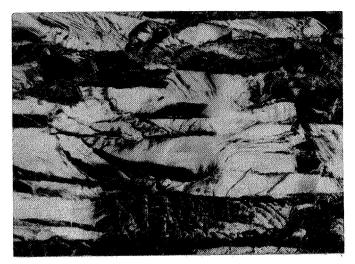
Fracture face from compressive failure.  $6-3/4~\rm X$ .
